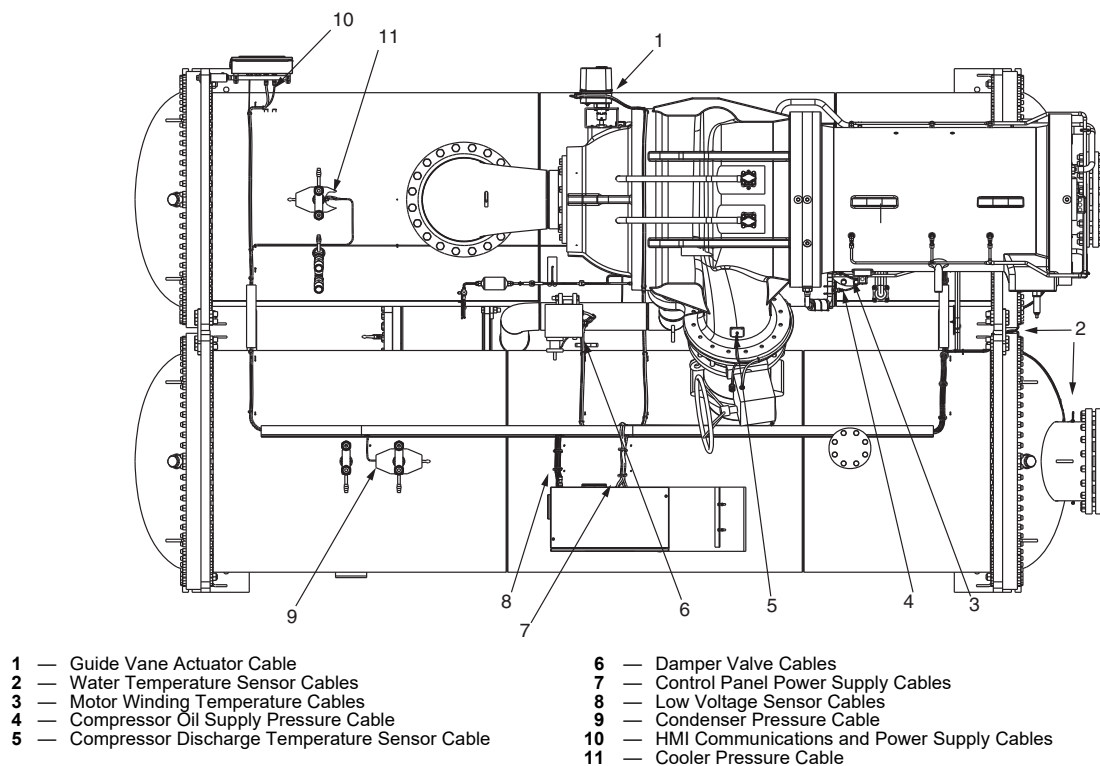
Chiller Top View (Compressor Frame Size 6 Shown), 19XR6/7
